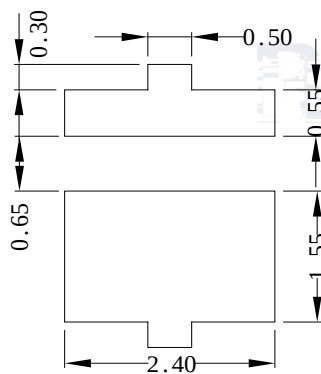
Soldering Patterns 推荐焊盘
